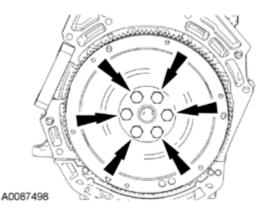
Locating Clutch Pressure Plate Bolts Courtesy of FORD MOTOR CO.
